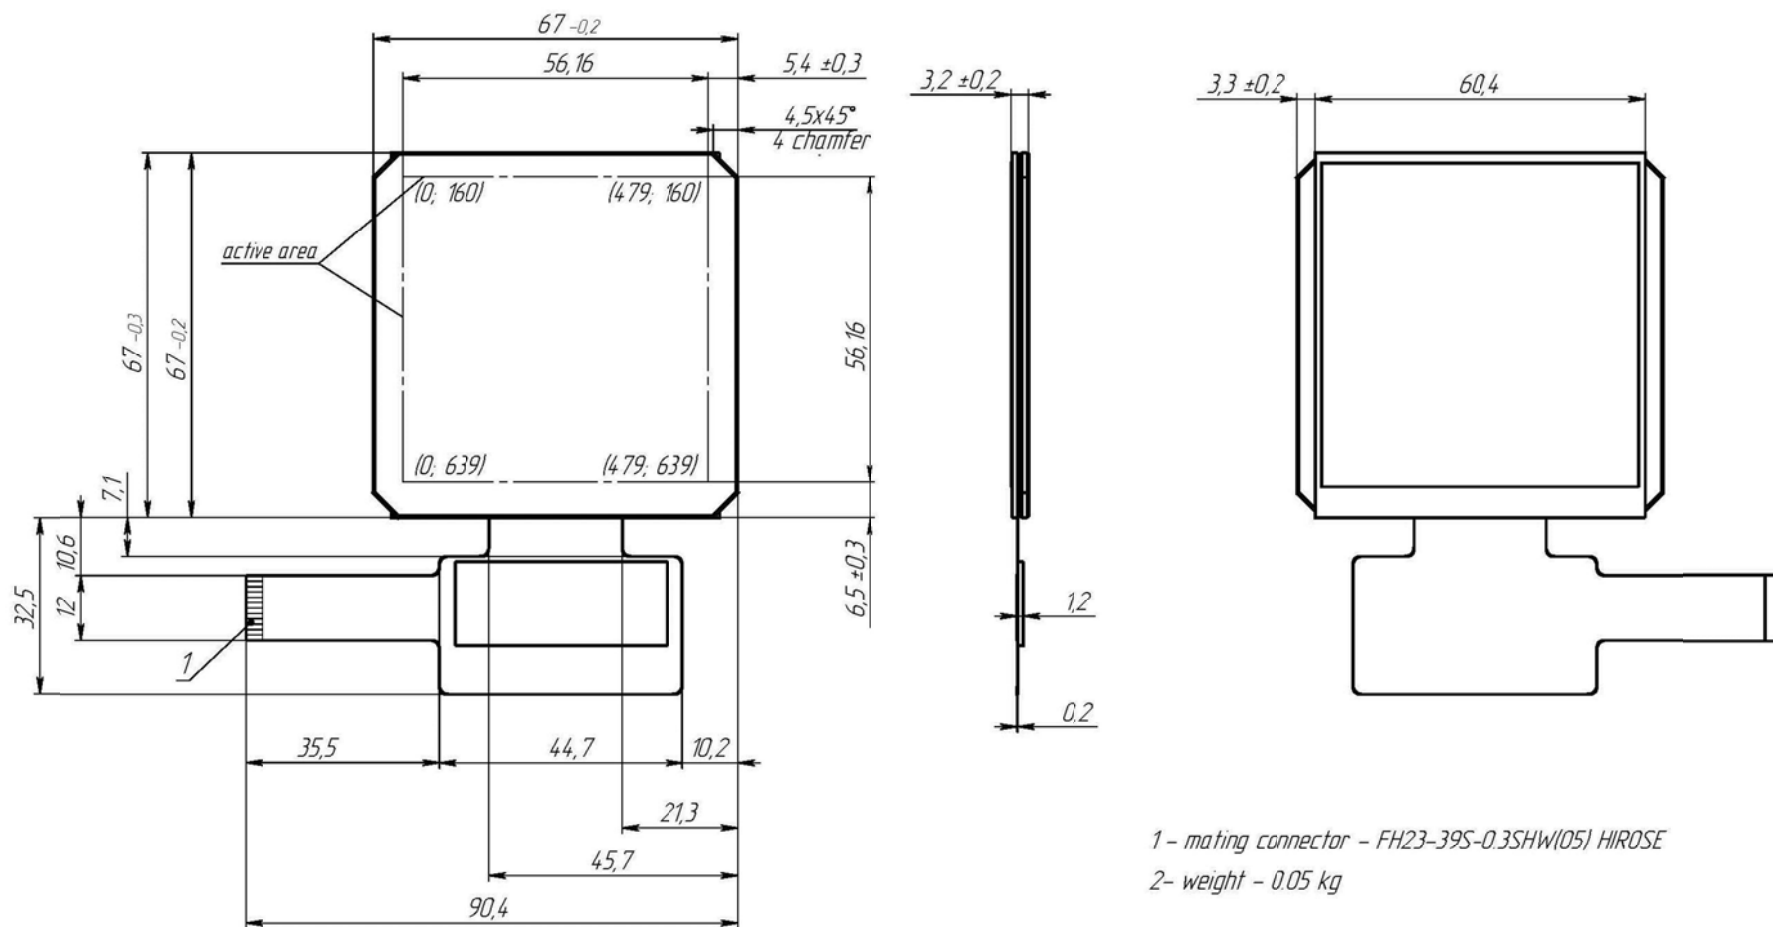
Installation and dimensions drawing NVIT.433811.045-01
